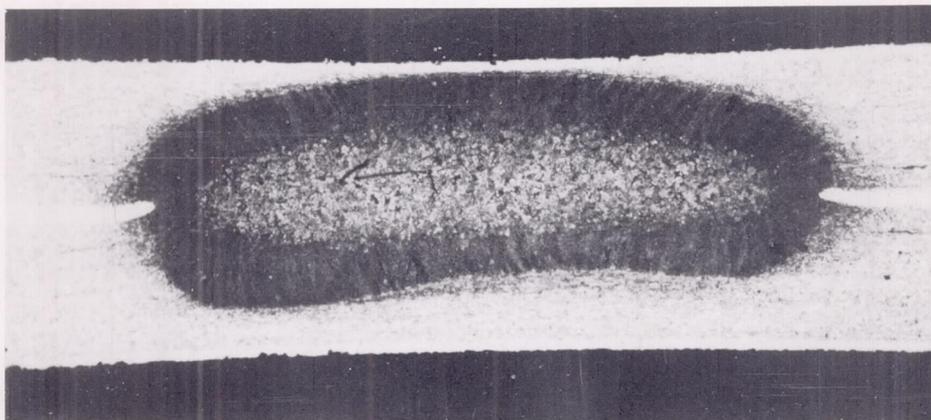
Macrograph showing weld nugget slightly below clad surface in sample 9F, alclad 24S-T3, welded under conditions to produce a sound weld after wire-brush preparation and exposed 3 years to sea coast atmosphere, X20. Keller's etch, 20 seconds. Compare with figure 31.
